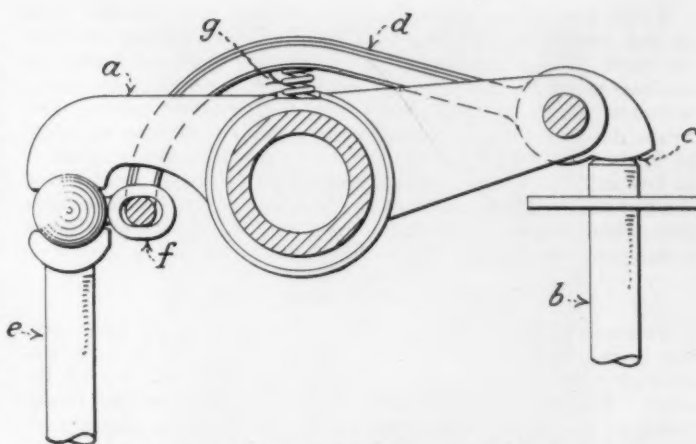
A ROCKER-ARM WITHOUT CLEARANCE
